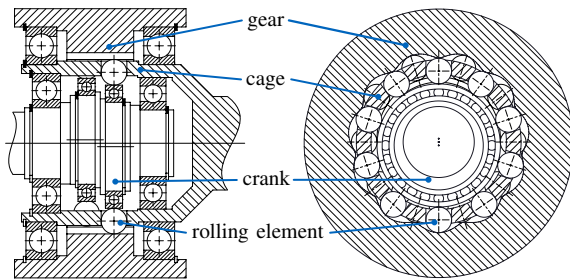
Structure and components of a rolling element eccentric drive. (Adapted from [5] under CC BY 4.0)
